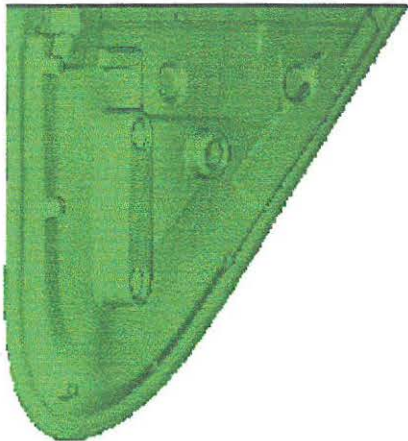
Motorcar door window rubber seal, frontal-left-hand view.
